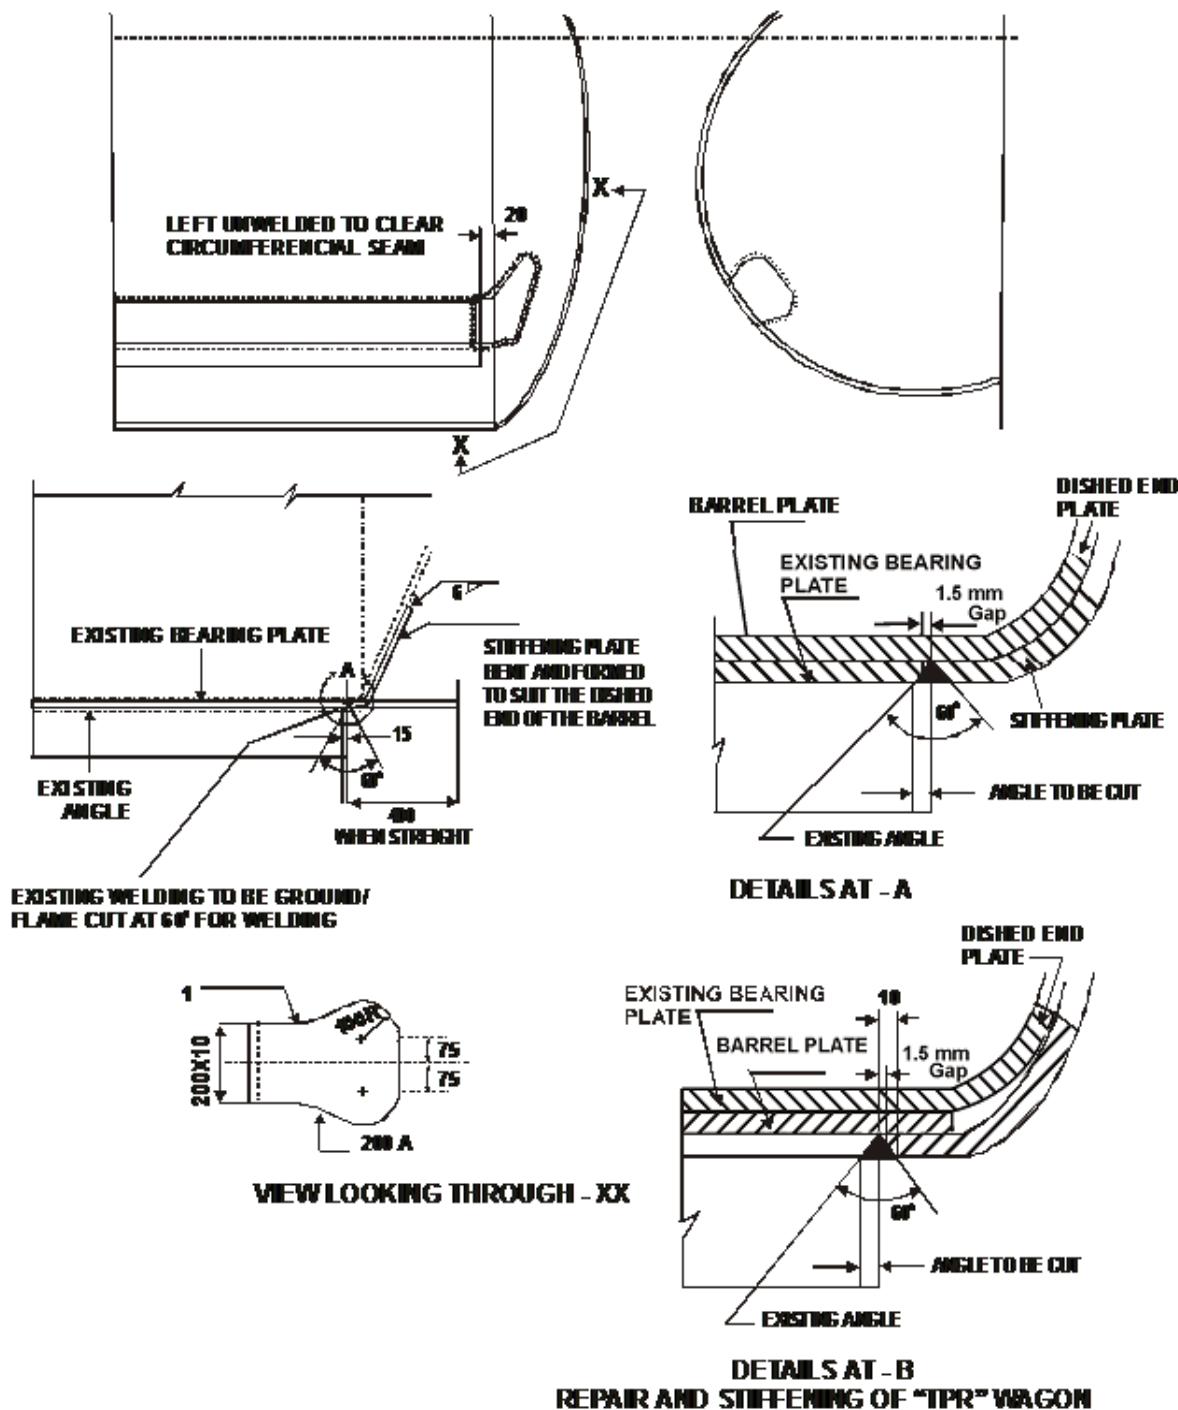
TANK WAGON WITH BEARING PLATE OUTSIDE
